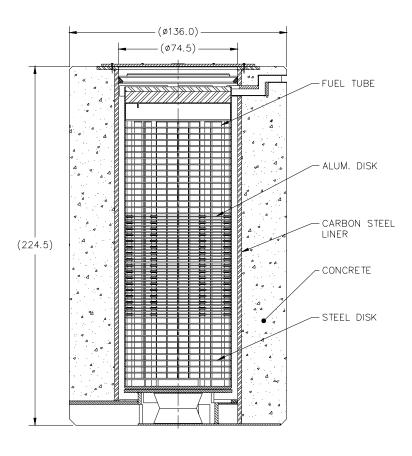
Vertical Concrete Cask Containing a BWR Basket and Canister
